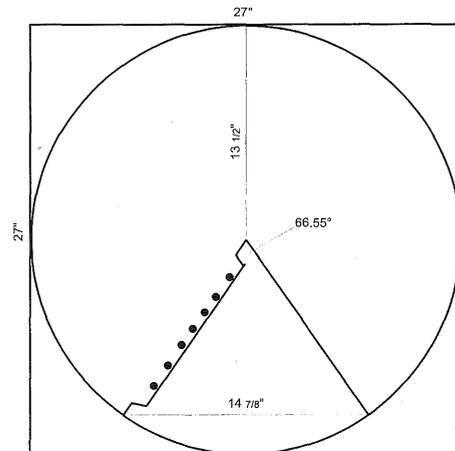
This cone is constructed of 26-gauge galvanized steel. Overlap the tab and pop rivet together. When complete, the cone will be about 8" high and 22" in diameter. Place the cone point up in the bottom of the barrel feeder (Appendix D: Fig. D1) to force the shelled corn outward against the ½" x 1" weld wire or ½" x ½" hardware cloth.
